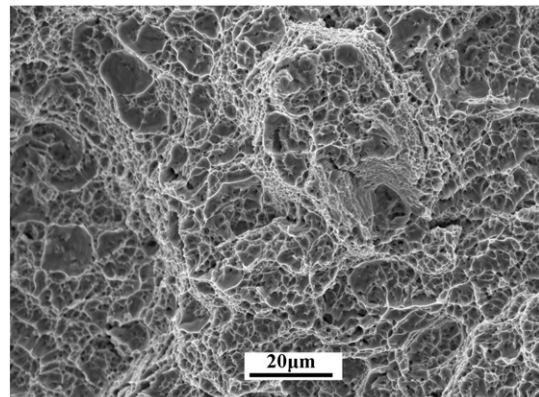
Detail of fracture surface of aged-SW91-A specimen, SEM.
